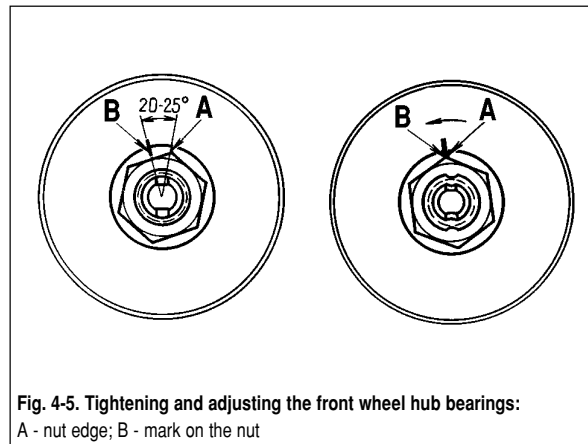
Tightening and adjusting the front wheel hub bearings:
